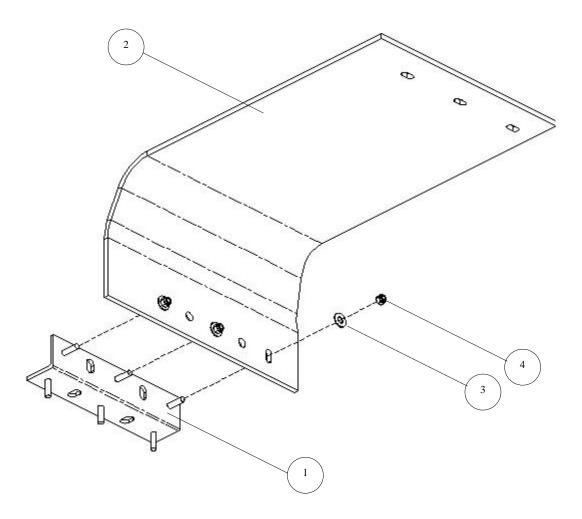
Upper Wheel Well Panel Pre-Assembly.
